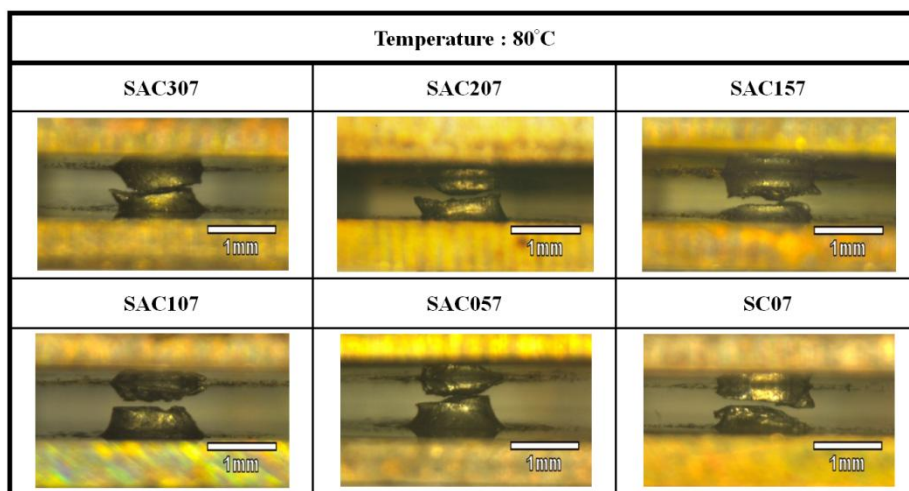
Different fracture modes of SAC solders at 80 °C
